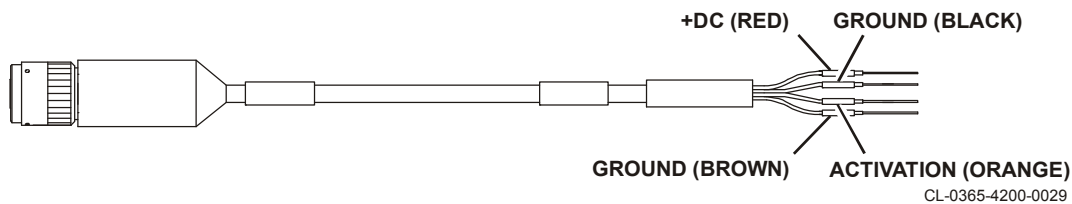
Cable Assembly, BGAN DC Power to 4 Leads, 12043-0890-A0xx
